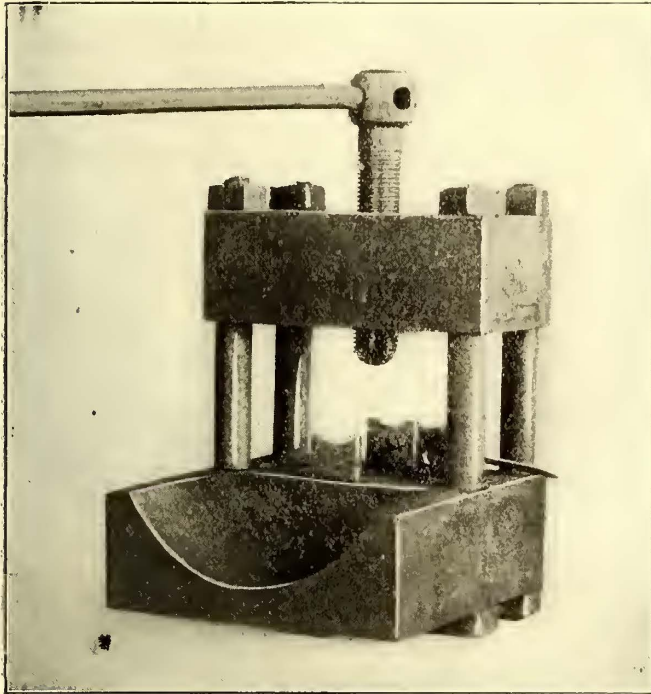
Maintenance of Equipment—Screw Press for Straightening Armature Shafts
